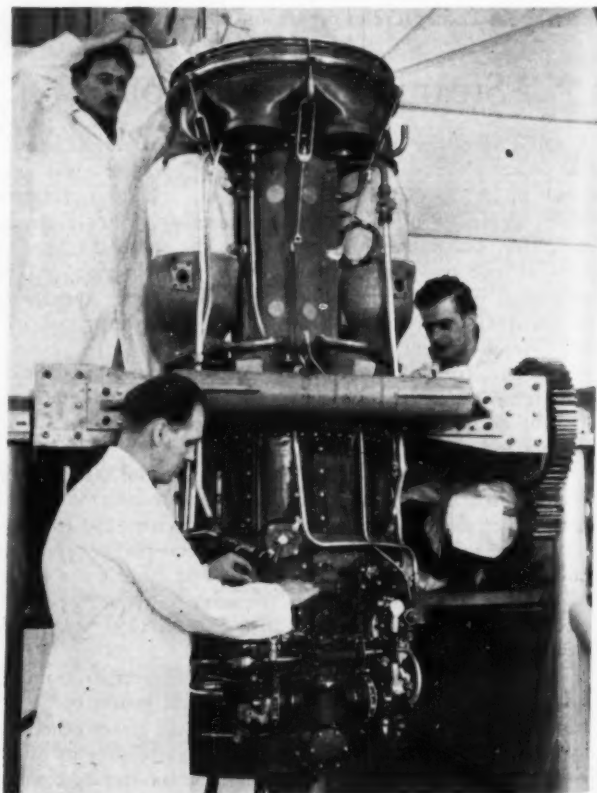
CHINOOK JET ENGINE IN FINAL ASSEMBLY STAGE
